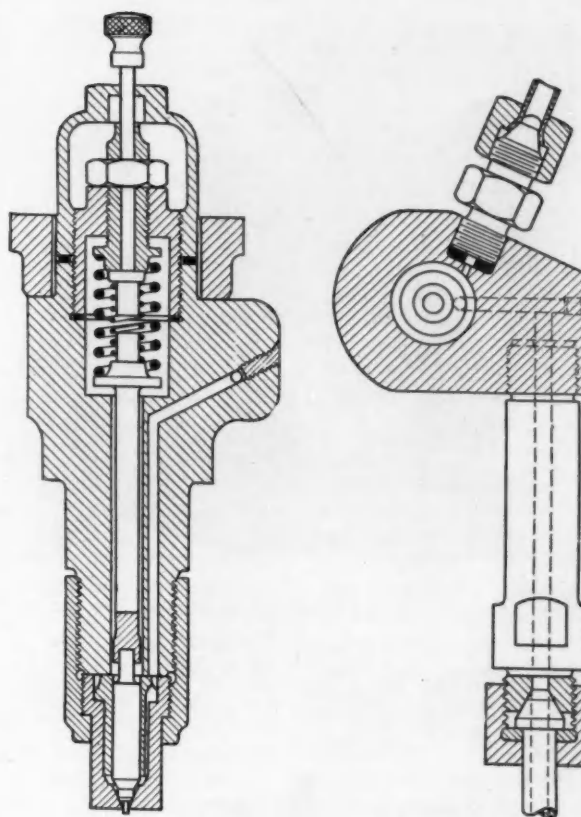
M.A.N. ENGINE INJECTION-VALVE
